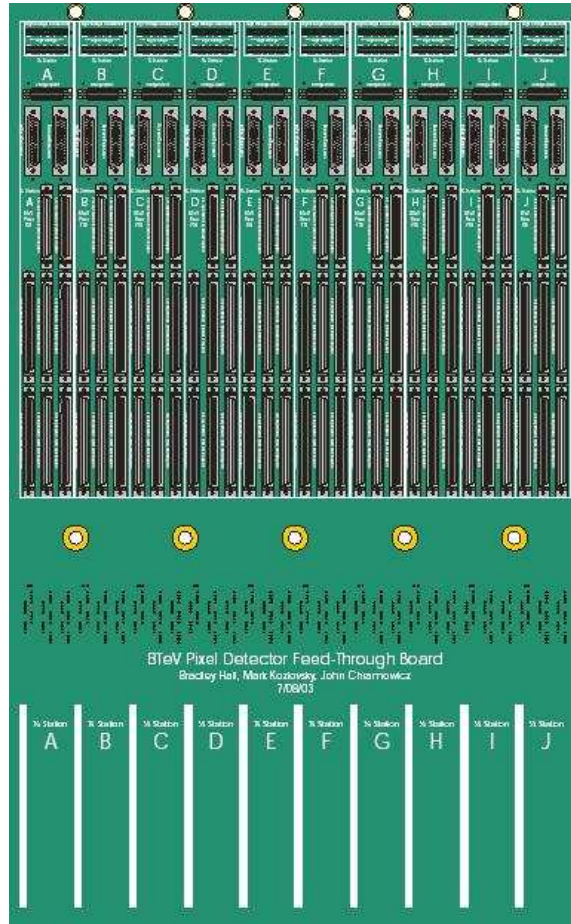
Front view of the Feed-through Board now being layout and reviewed.
